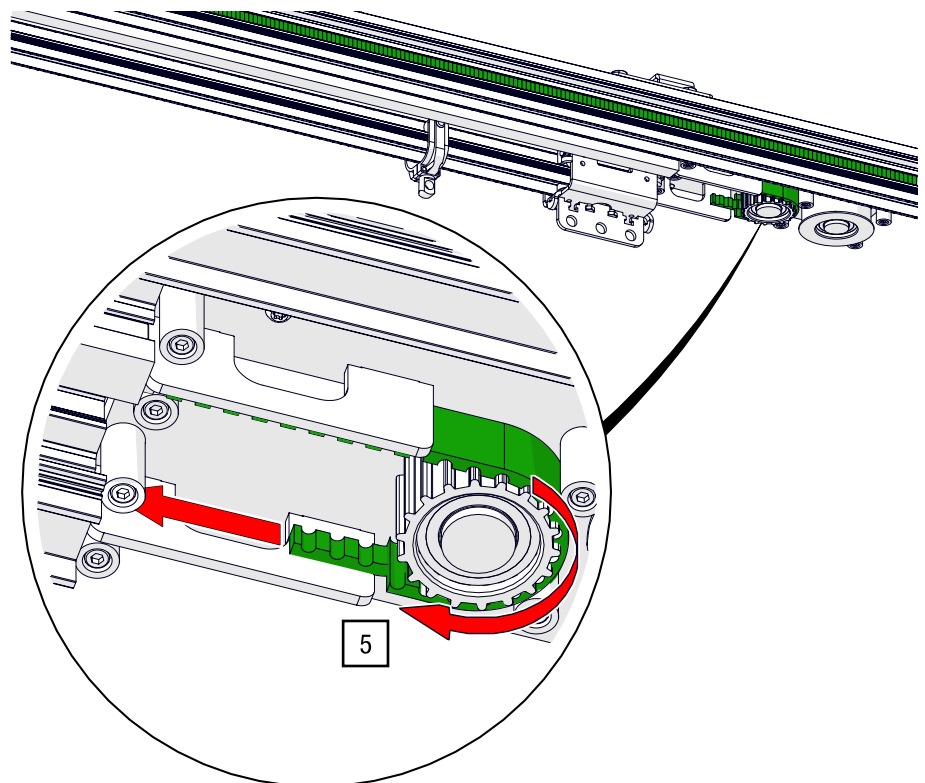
Timing belt installation – Threading timing belt through inner wheel on the deflection unit
